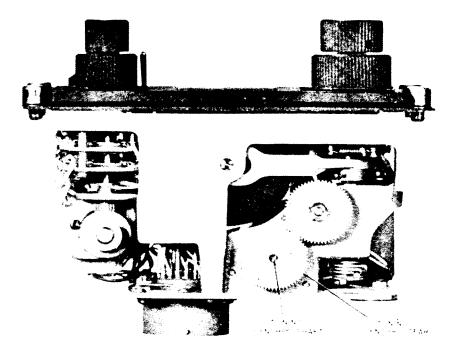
Direction Finder Control C-6899/ARN-83, parts location.
